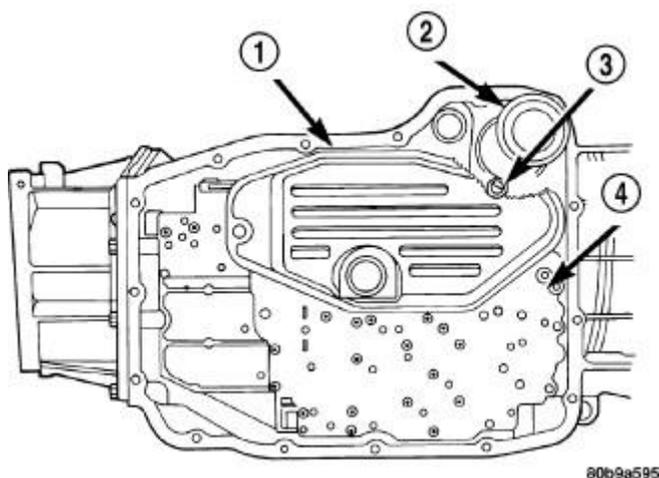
Primary Oil Filter & Oil Cooler Return Filter
